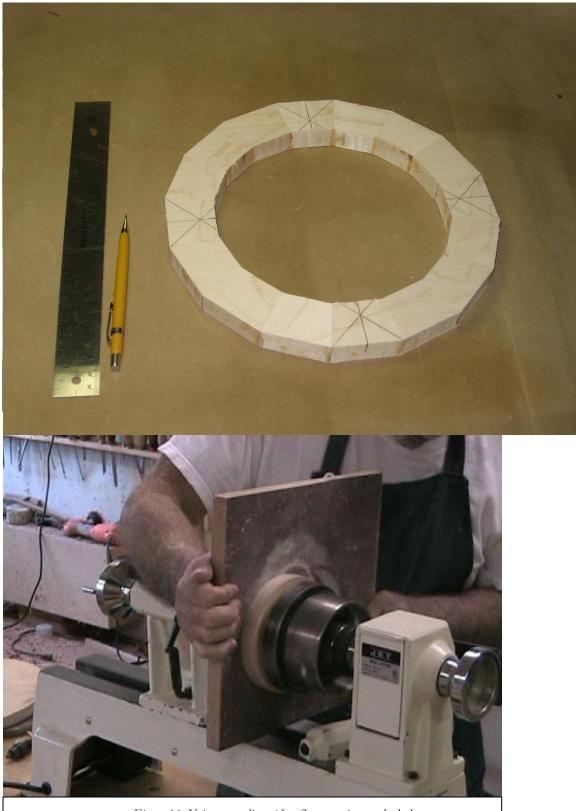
Using a sanding aid to flatten a ring on the lathe.
